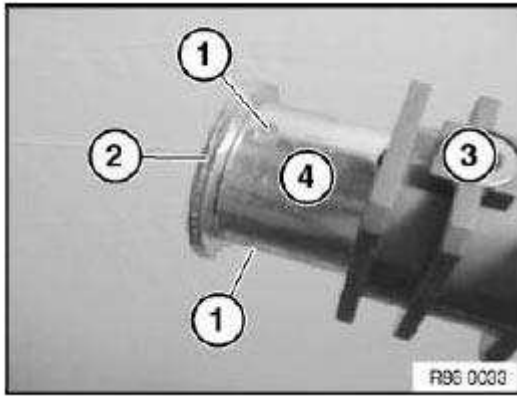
Identifying Pins, Counter Support & Guide Bush
